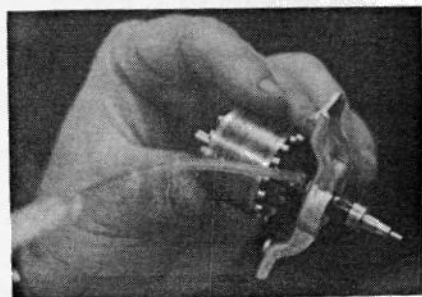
DEGREASE, THEN LUBE the upper motor bearing before replacing the motor on the turntable.
